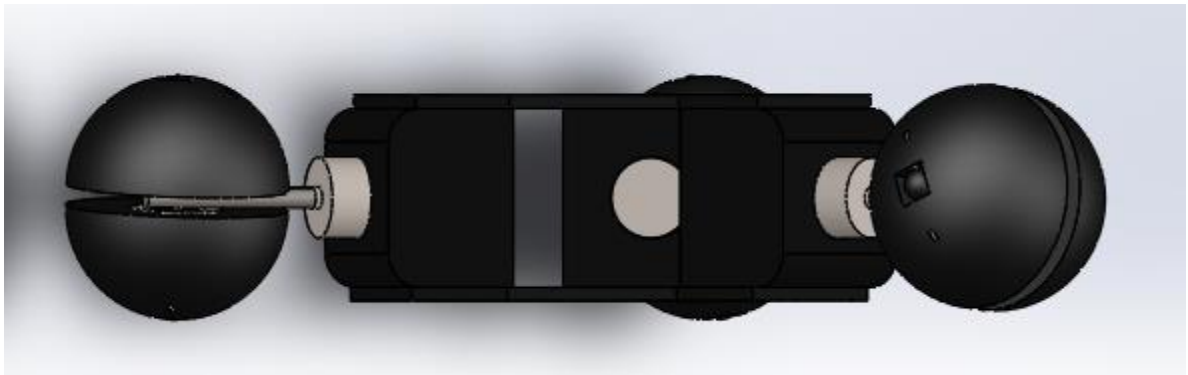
CAD Model of Prototype IV with Final Wheels (Side View)
